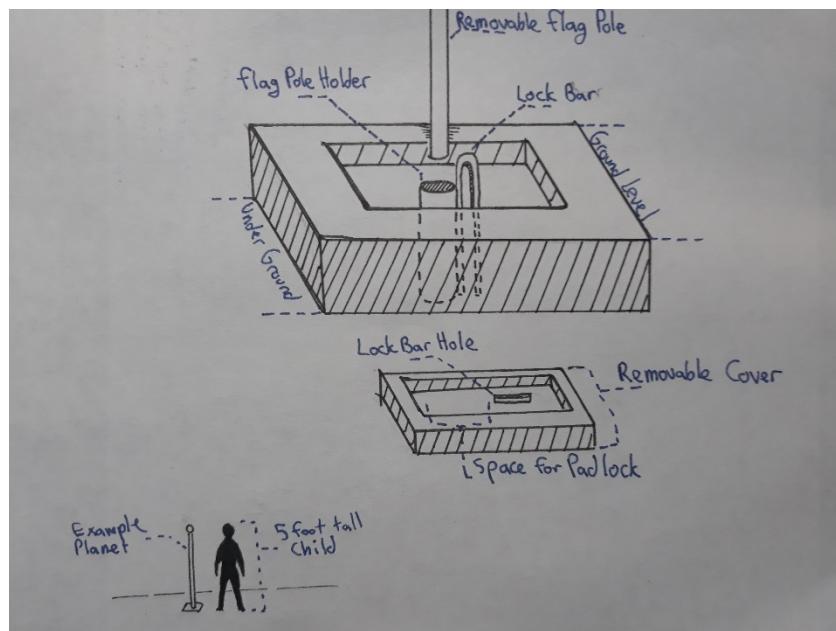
Initial sketch of Covered Flag Pole Design.
